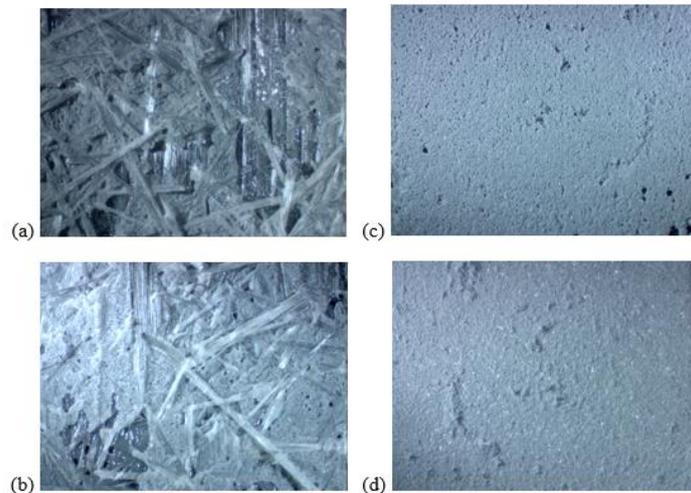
Fracture surfaces of MMB test with composite on top from the (a) composite and (b) steel sides, and with steel on top from the (c) steel and (d) composite sides.
